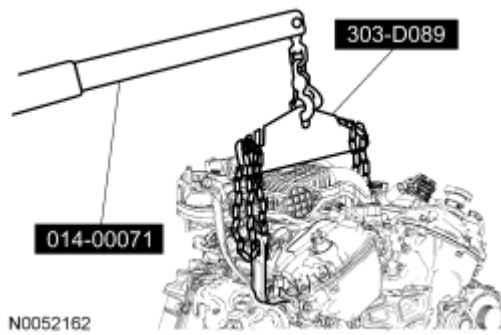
Removing Engine & Transaxle From Lift Table Using Special Tools (303-D089, 014-00071) & Suitable Engine Crane
